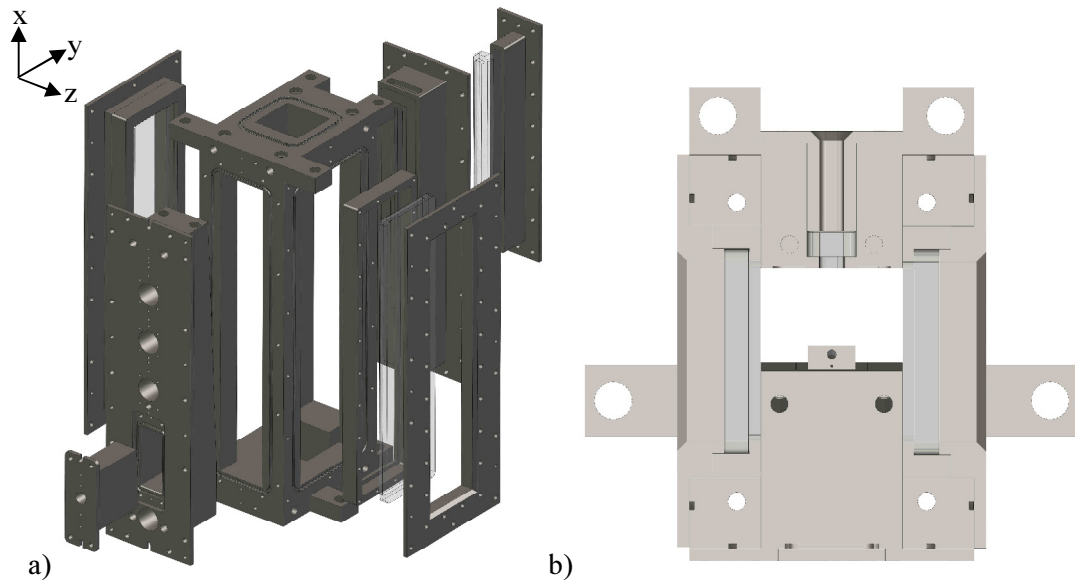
Combustor section solid model assembly: a) exploded view including the combustor side wall, fuel injector insert, side window frame assemblies and observation window frame assembly, b) Top view cross-section assembly.
